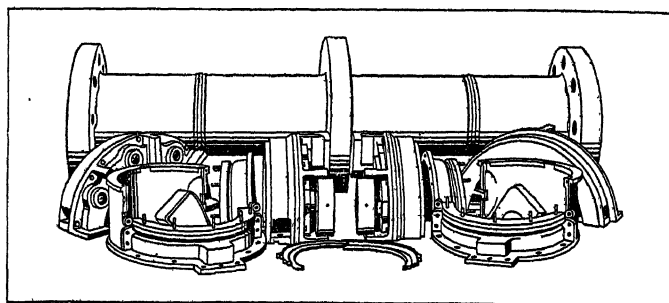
COMPONENT PARTS OF MICHELL THRUST BLOCK, SHOWING THE SINGLE COLLAR ON THE SHAFT
